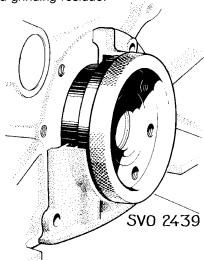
Centering the rear sealing flange (4-cyl. engine)
